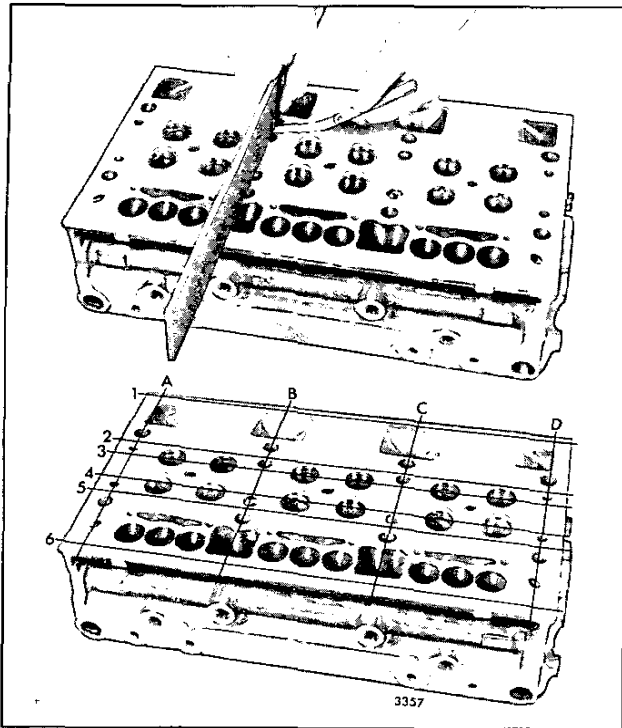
Checking Bottom Face of Cylinder Head for Warpage
